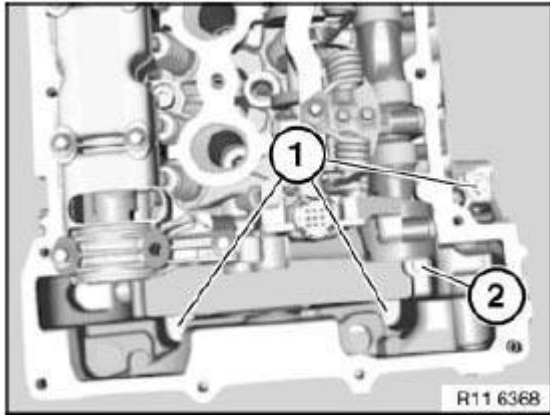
Identifying Timing Chain Module Bolt And Screw
